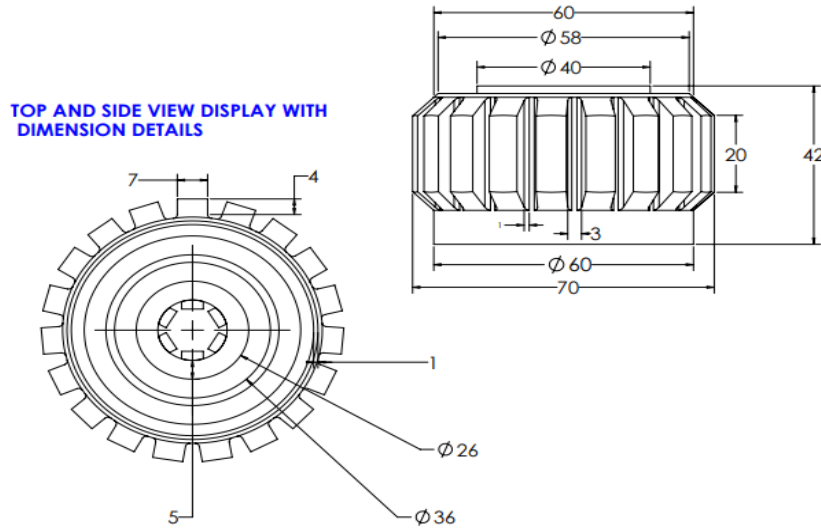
Detailed Design with Dimensions of the Top and Side views
